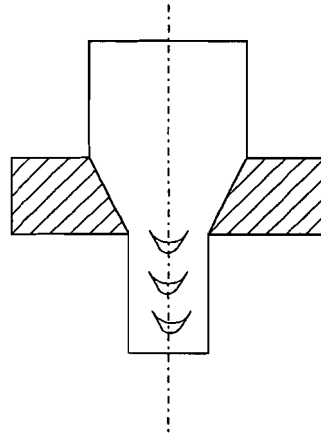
κ -Crack, a crack which is defined as a centre crack or centre burst. This crack can occur in wire drawing or forward rod extrusion.
